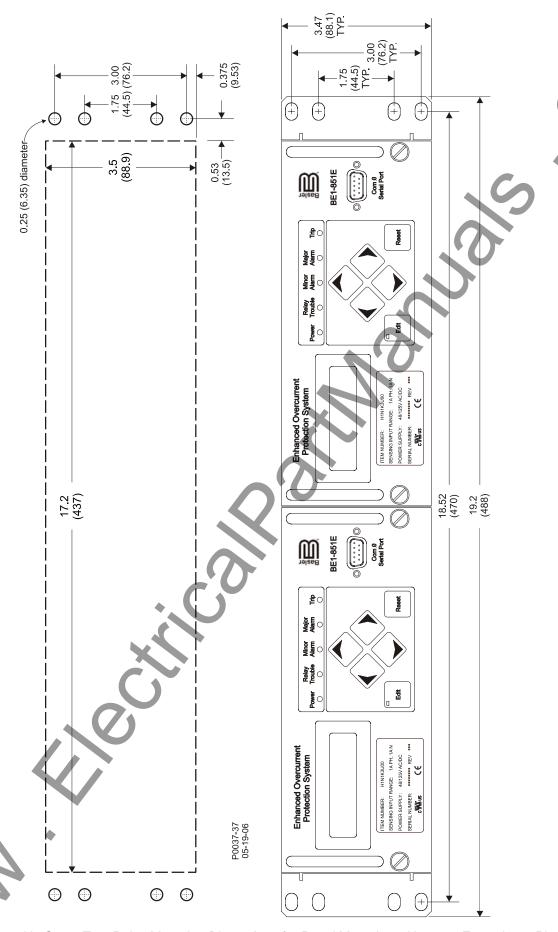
H1 Case, Two-Relay Mounting Dimensions for Panel Mounting without an Escutcheon Plate
